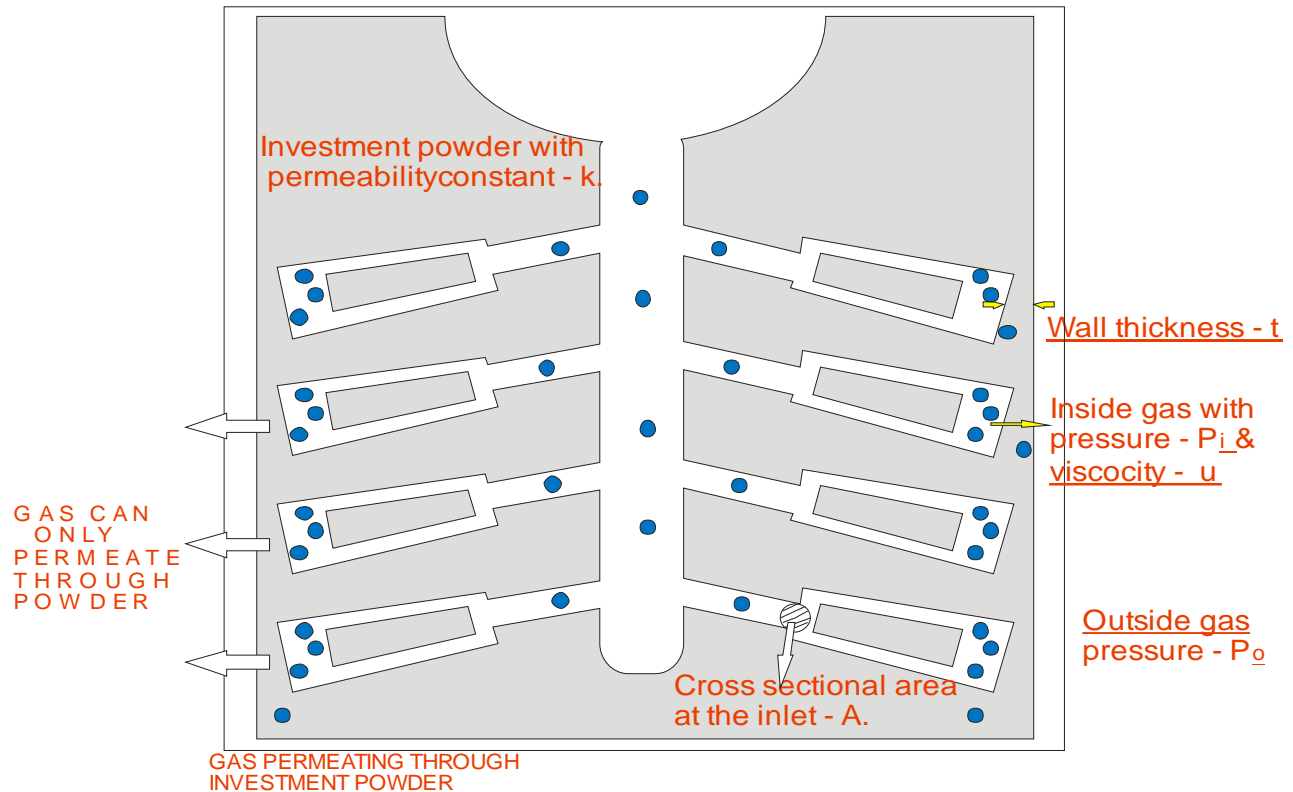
SCHEMATIC SHOWING GASES PERMEATING THROUGH INVESTMENT POWDER
